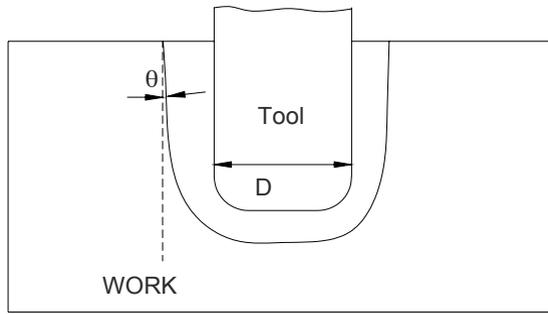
Tapered hole produced by USM (θ is the taper angle)
